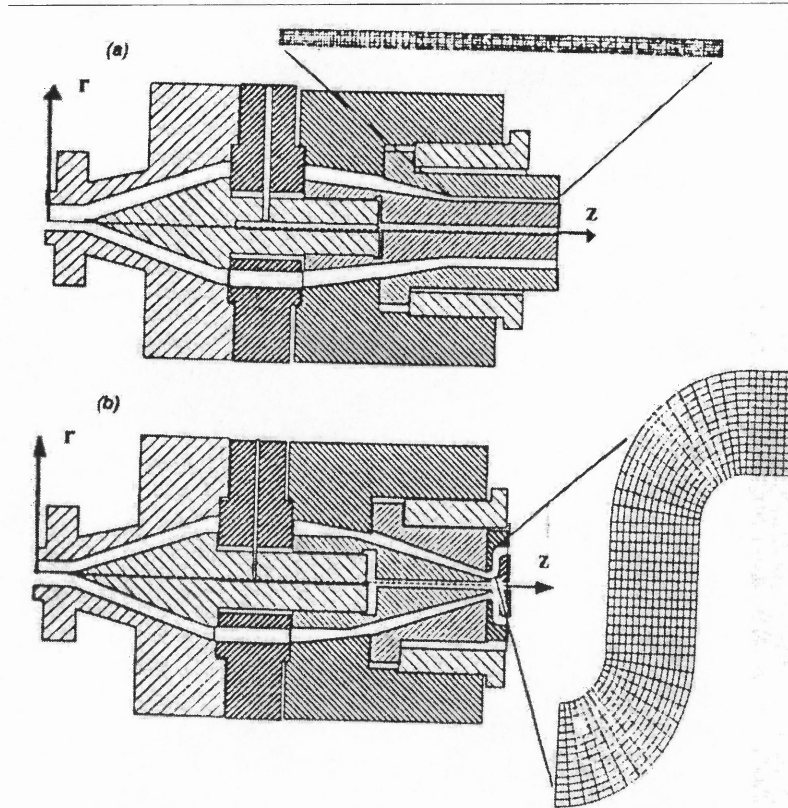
Two types of extrusion dies. Top is the classical which resembles the extrusion method used in the present study. The lower die is an example of a diverging die which could be useful in future collagen tube research. Source: Ausias, G., Vincent, M., Optimization of the Extrusion Process for Glass-Fiber-Reinforced Tubes, *Jour Thermoplastic Comp Mater*, 8, 435-448, 1995.
